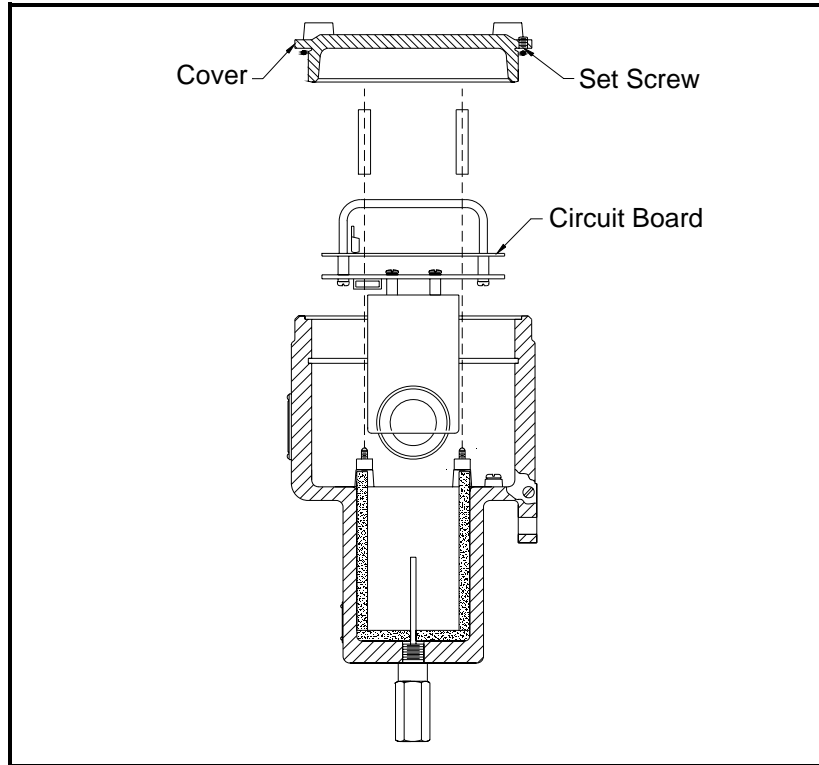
XMO2 Cover, Set Screw, and PCB
